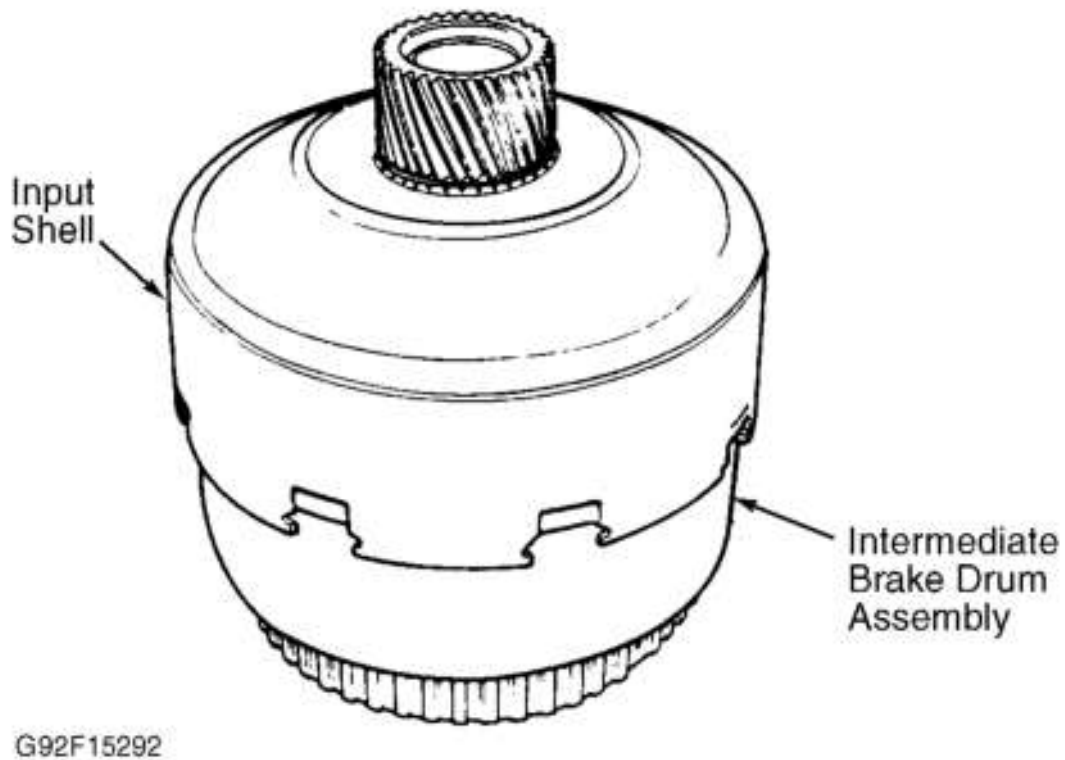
Assembling Direct Clutch, Forward Clutch & Input Shell
